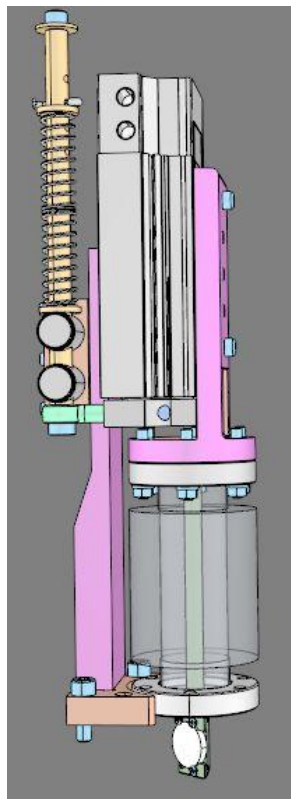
3D CAD model of the Cathode Viewing Mirror assembly.
